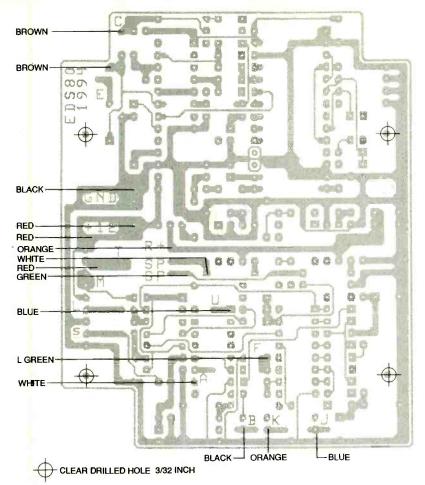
VOICE/OPTIONS PARTS PLACEMENT DIAGRAM reverse side. Wiring for the main alarm board is located here.
